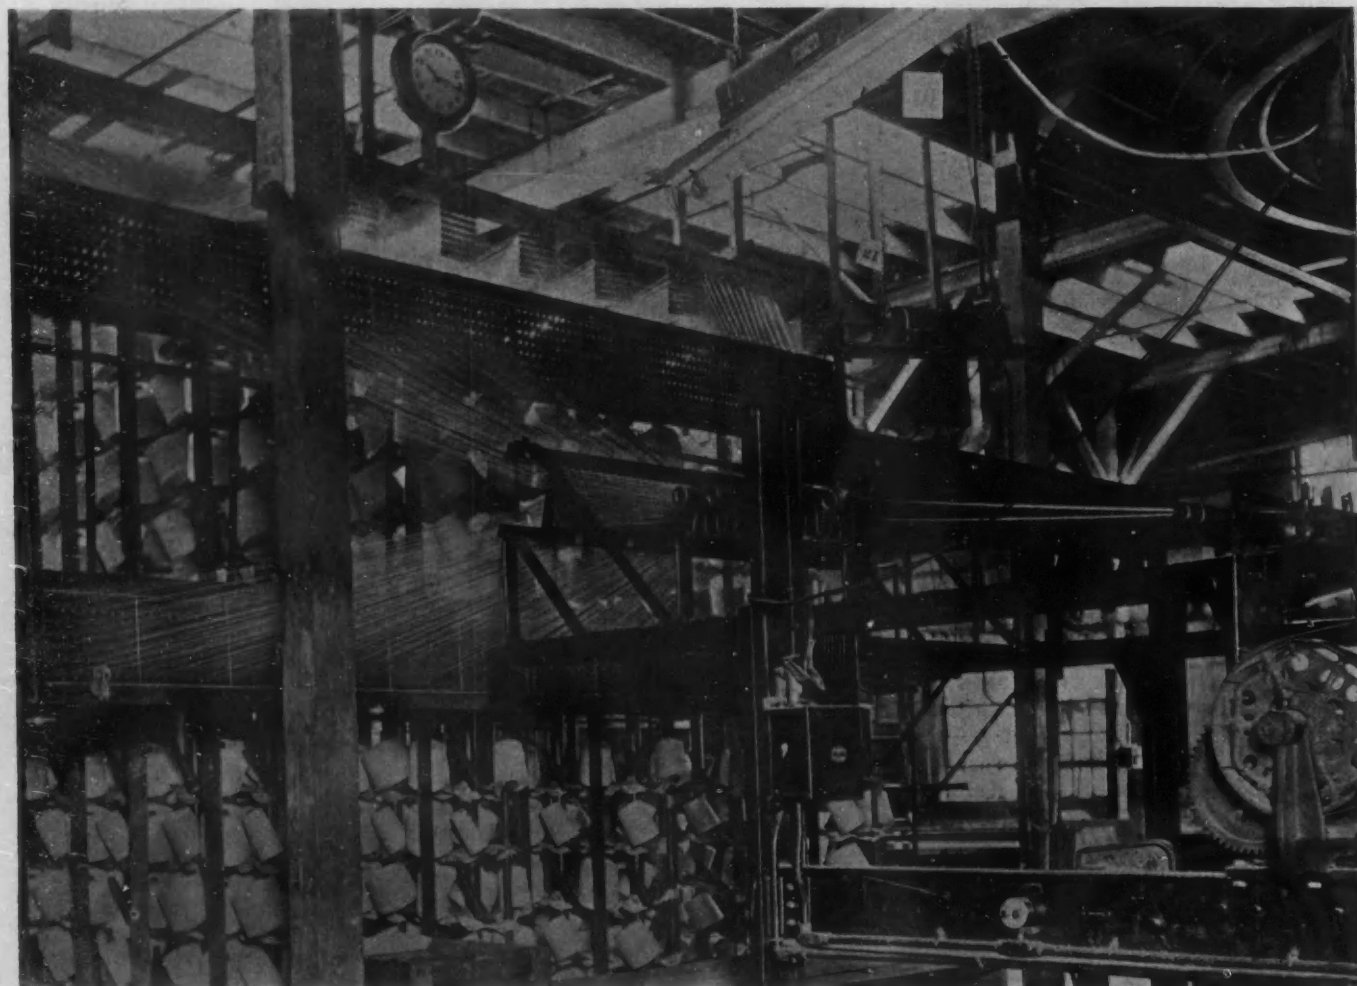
PART OF A WEB-CORD FABRIC-FORMING MACHINE
